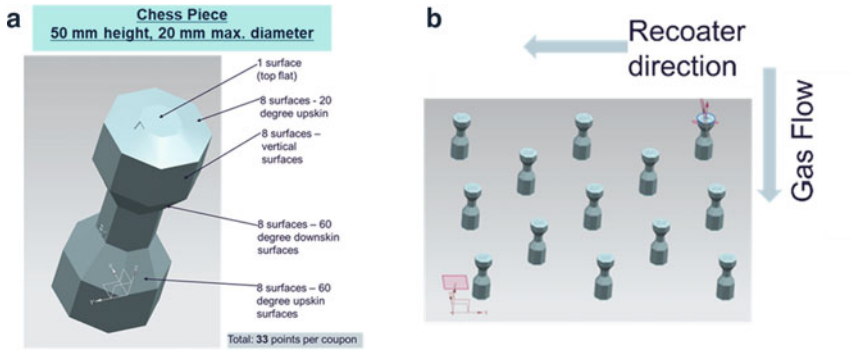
a CAD model of “chess piece” b Typical layout of the “chess pieces” in the build plate
